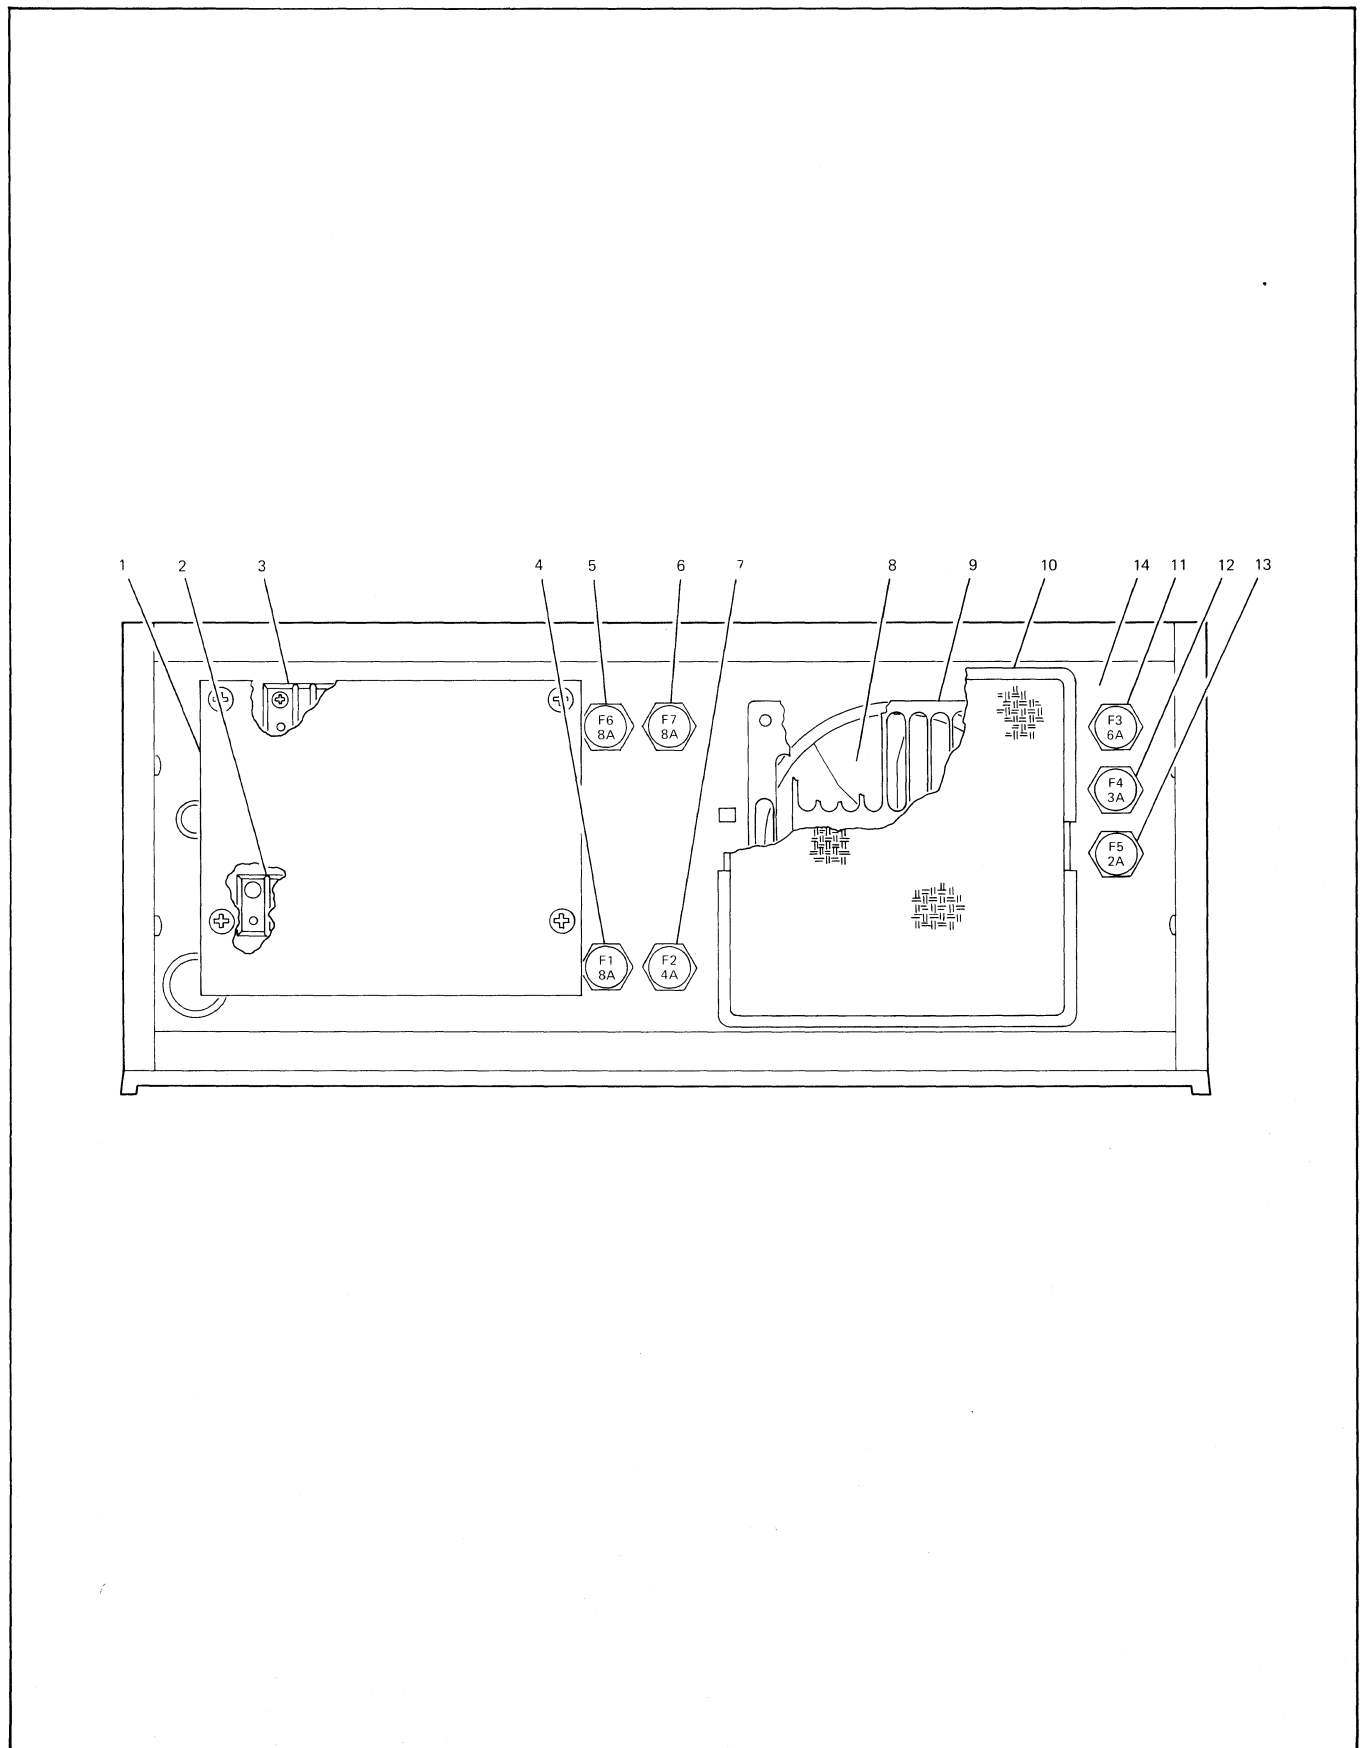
Rear Panel Assembly Parts Location Diagram
